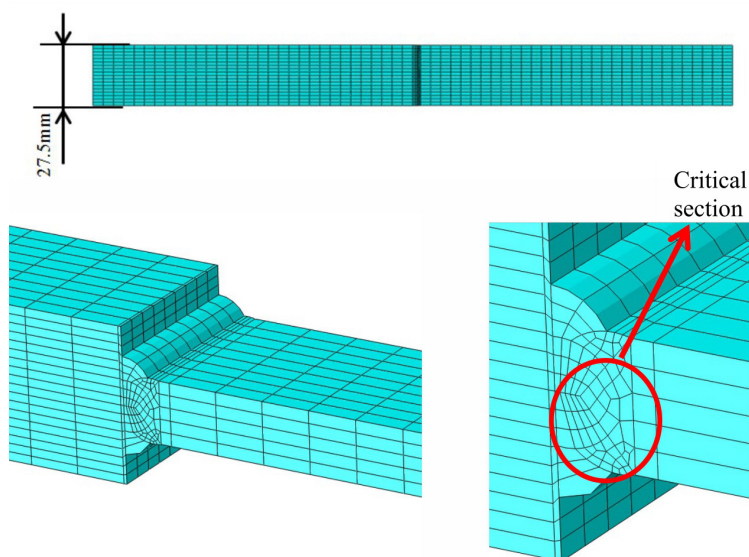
Test specimen dimensions and mesh (zoom on the right)
